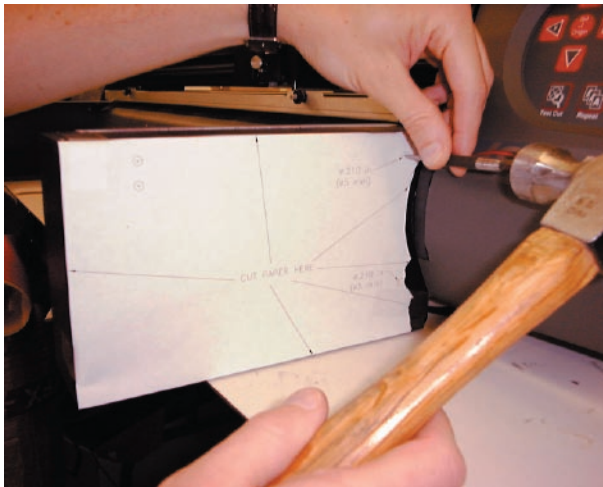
Use a metal punch to mark the location for the holes to be drilled.
